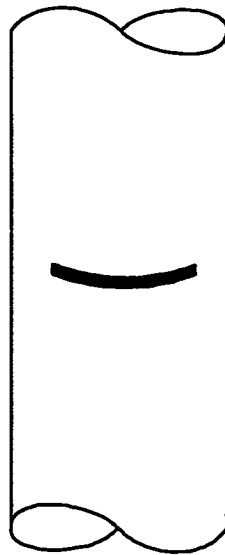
Pipe II with the circumferential groove machined corrosion.
